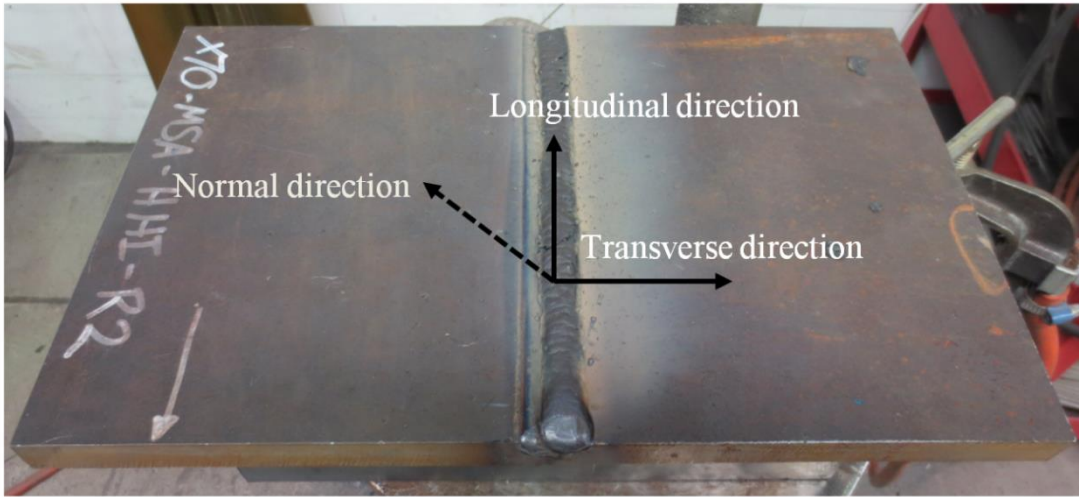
Welding specimen showing three directions of strain measurements.
